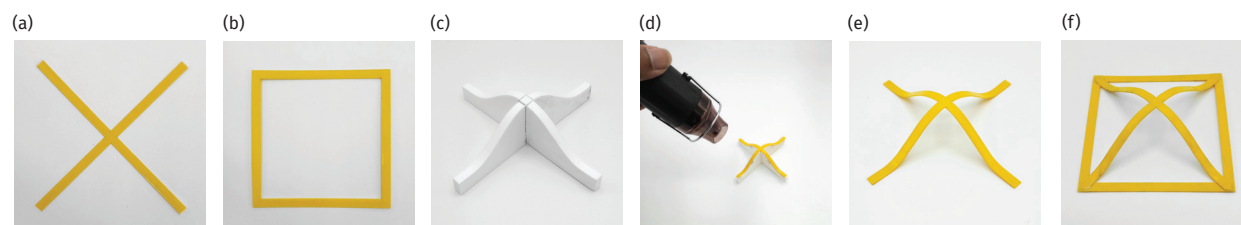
Fabrication process of one of our units. We begin by laser cutting (a) the arch precursor and (b) the base from a flat 0.5 mm thick PETG sheet. (c) We 3D print a mold of the desired sinusoidal shape and (d) paste the flat arch precursor on the mold by double-sided tape, then heat treat it for about 2-3 minutes; (e) once it cools down, and after removing it from the mold, it retains an arch shape. (f) The sinusoid is then bonded to the base.
